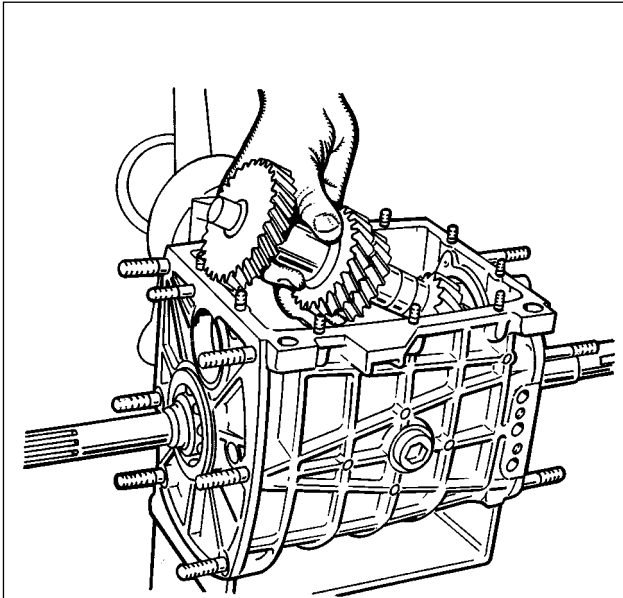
Withdrawing the intermediate shaft from transmission casing
